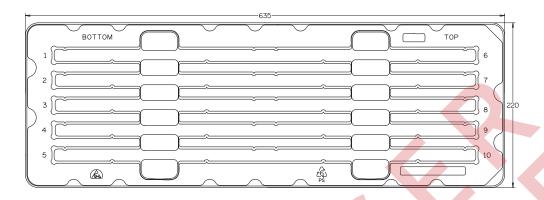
Tray dimensions for L218-xxxx0ccCx0000.
